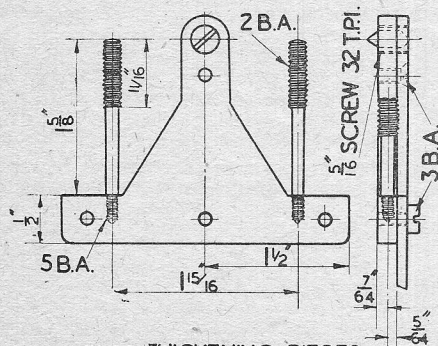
THICKENING PIECES ON OUTSIDE PLATES
